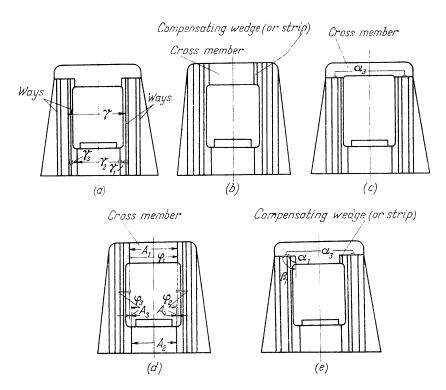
Possible versions of the construction arrangement of portal-type (double-housing) machine tools
